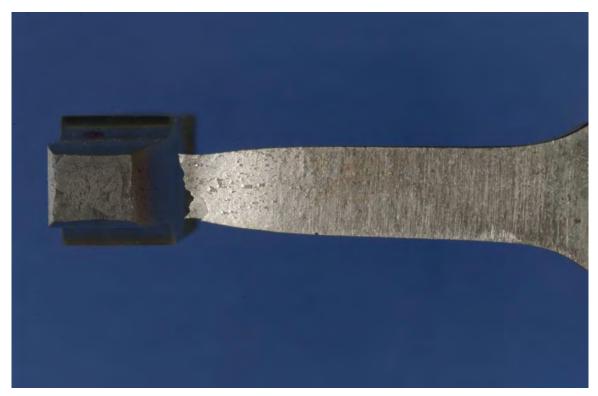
Tensile test specimen fracture on sample N1. L3937 071816 04
